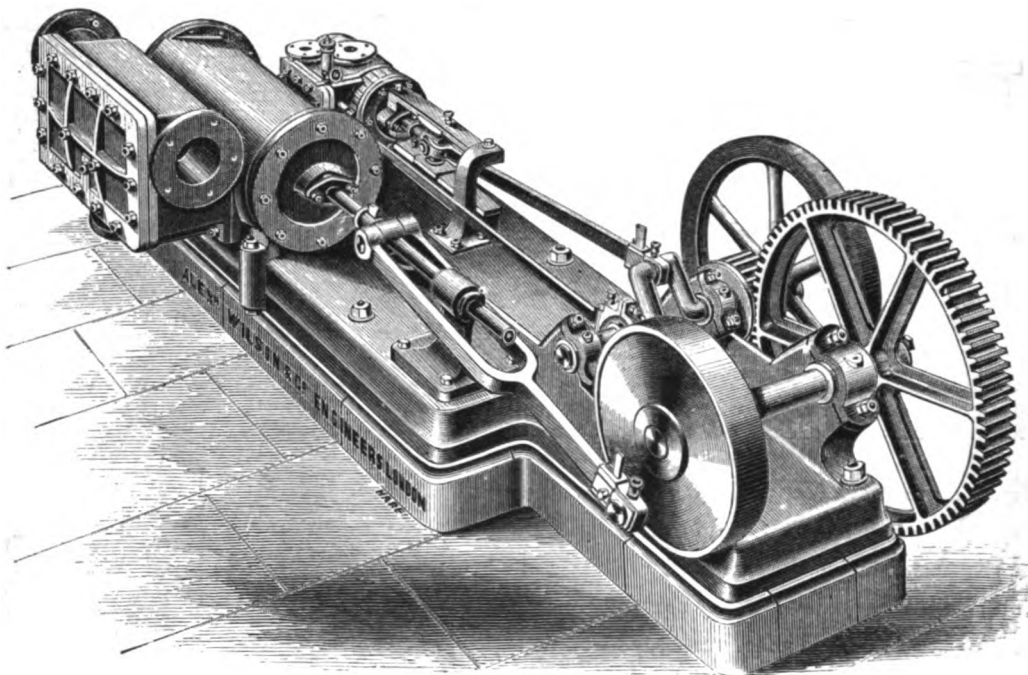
represents a large Double-acting Pump, 12 inches diameter, 18 inches stroke, driven by a Special Steam Engine, having a steam cylinder 6 inches diameter, 12 inches stroke, the speed of the Pump being reduced from that of the Engine by means of wheel and pinion. By this arrangement the speed of the steam piston is maintained at the proper speed for the most economical use of steam, while the water piston travels at the moderate speed necessary in pumping water. It is complete on one Bed-plate, which is the most convenient arrangement, as it requires no skill to fix it for work, while it is economical in its work as compared with centrifugal pumps when pumping water over 30 feet high, and it is much superior to them in being able to draw from a depth. They are admirably adapted for drainage and irrigation purposes; pumping out cofferdams, and other contractor's work; small water-works and pumping stations for railways; also for many other purposes which will suggest themselves to Engineers requiring such Pumps. The larger sizes are well adapted as Fire Engines, and for raising sunken vessels, when fixed on the deck of a tug. They can also be made portable by fixing them on the top of a Boiler of the Portable Engine type. We make these Pumping Engines of various sizes, as will be seen from the Tabular List on following page. For prices of Boilers to suit these Pumps, see our Boiler Lists for Boilers of corresponding horse-power. Pages 26 to 31.
